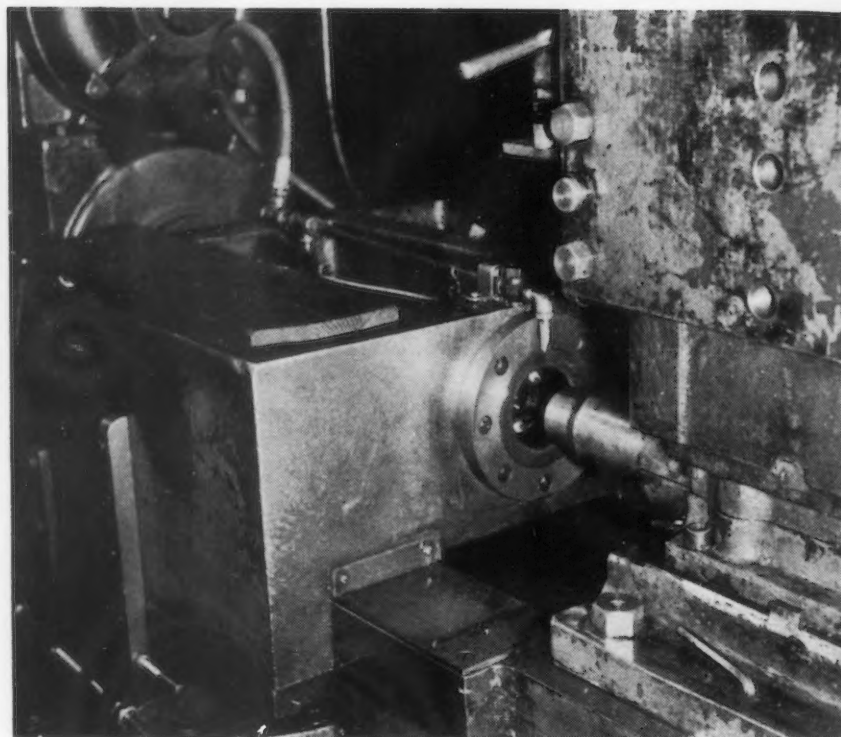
This tube end has been swaged to smaller diameter to receive a joint fitting, which will be welded on electrically.
